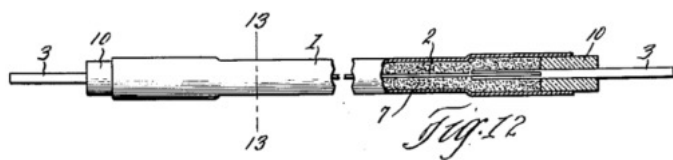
An early electric heating element showing the insulating refractory and protective metal sheath.^b
